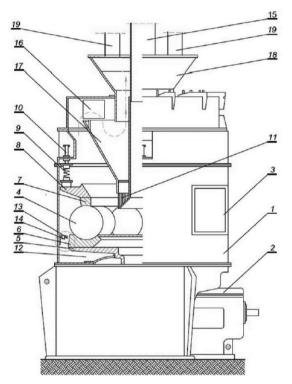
Coal mill construction: 1 – mill jacket, 2 – drive gear unit, 3 – installation door, 4 – milling ball, 5 – mill yoke (bowl), 6 – crushing ring (ball race), 7 – pressure ring, 8 – thrust ring, 9 – pressure spring, 10 – tensioning bolt, 11 – pivoting apron, 12 –pyrites chamber, 13 – through ring, 14 – air nozzle, 15 – chute, 16 – separator guide, 17 – separator chute cone, 18 – outlet head, 19 – dust ducts [14]
